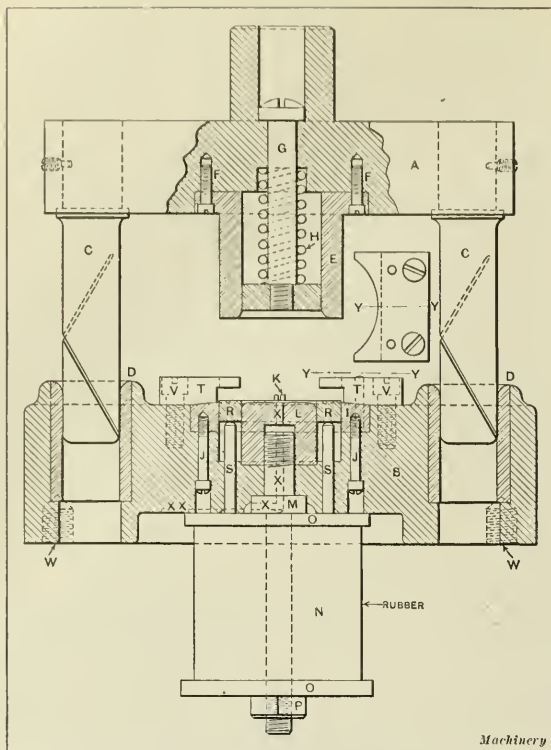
Compound Blanking and Drawing Punch and Die for Steel Cover
